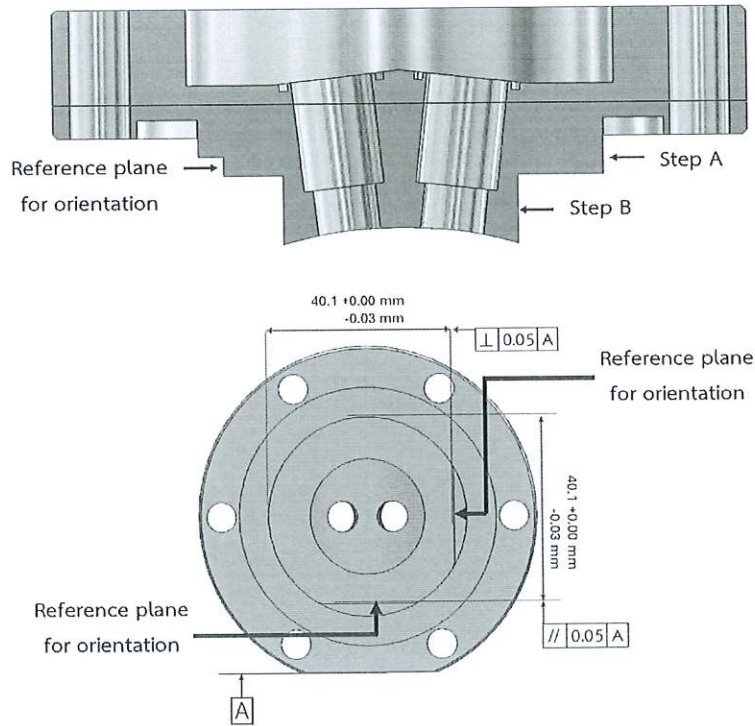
Cross section (top) and top view (bottom) of BPM flange
